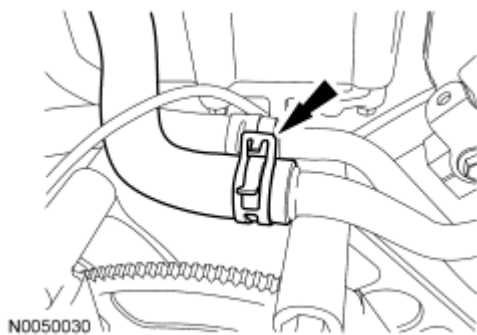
Disconnecting Intake Manifold-To-Coolant Tube Assembly Hose
